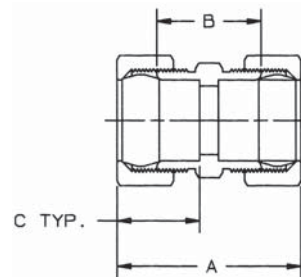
Dimensions — Weight — Packaging — Price
